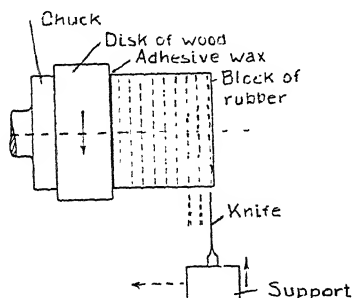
Cutting of disks 6 mm. thick on a lathe.
